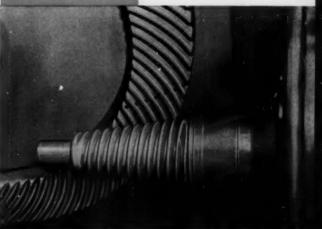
A 2:90 combination with 13.25-in. gear OD, 2.00-in. pinion OD, and 3.50-in. shaft offset for a precision spindle drive. Contact marks on gear teeth indicate simultaneous mesh with pinion teeth.
